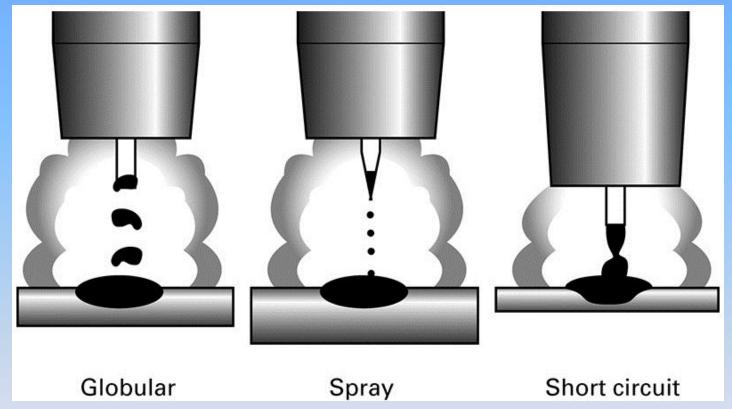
Three modes of metal transfer during arc welding. (Courtesy of Republic Steel Corporation, Youngstown, OH)
